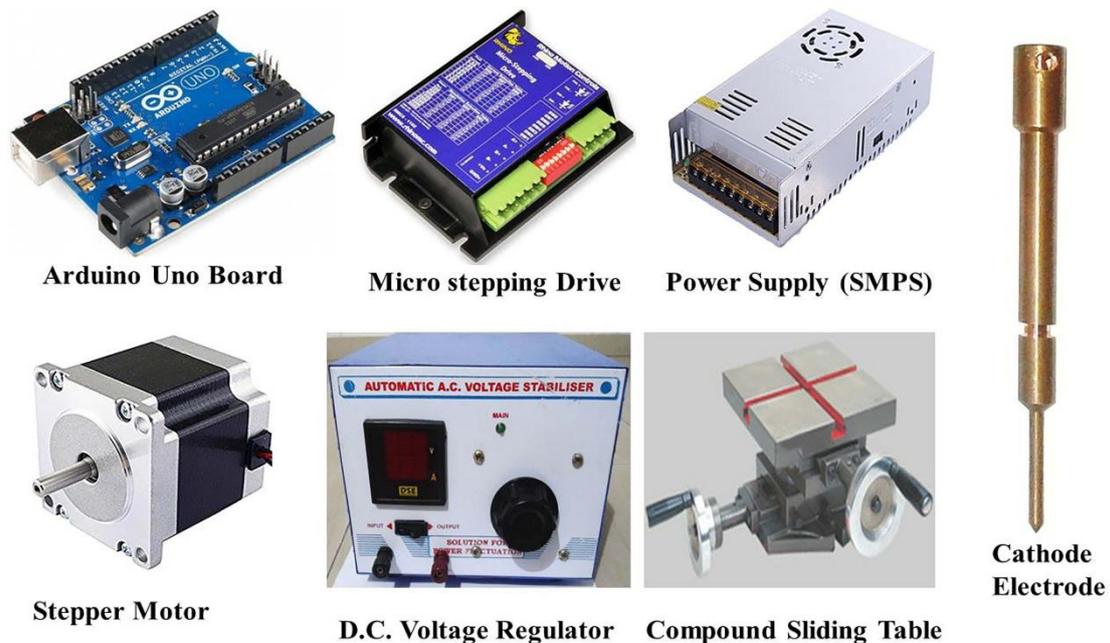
Mechanical, Electrical and Electronics parts of ECDCM machine setup
